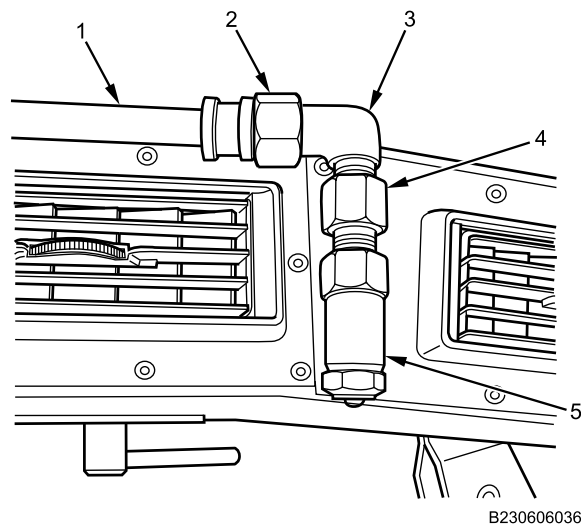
Front FSS Cabin/Crew Dispersion Unit and Pipe.
